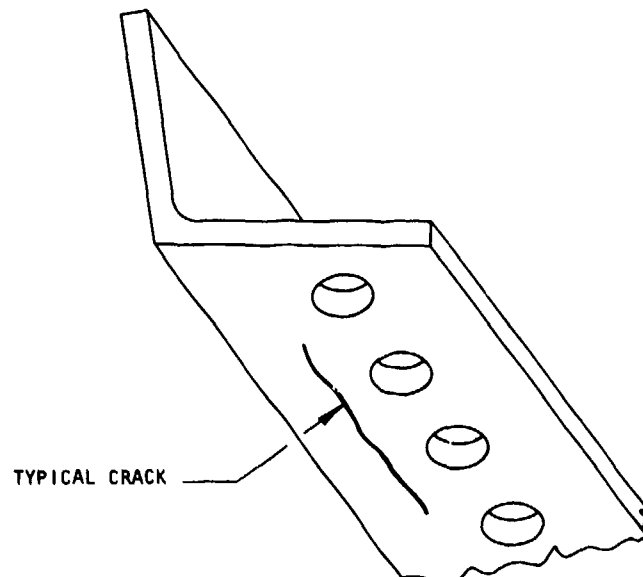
FRONT SPAR LOWER CHORD FLANGE CRACKING
